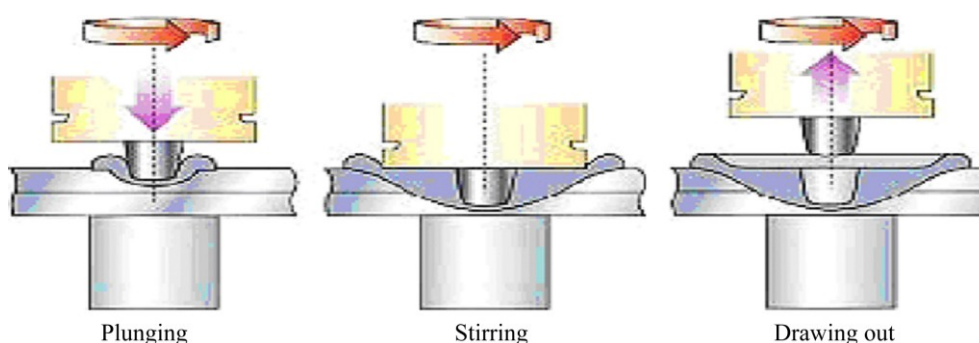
Schematic illustration of friction stir spot welding process [2]
